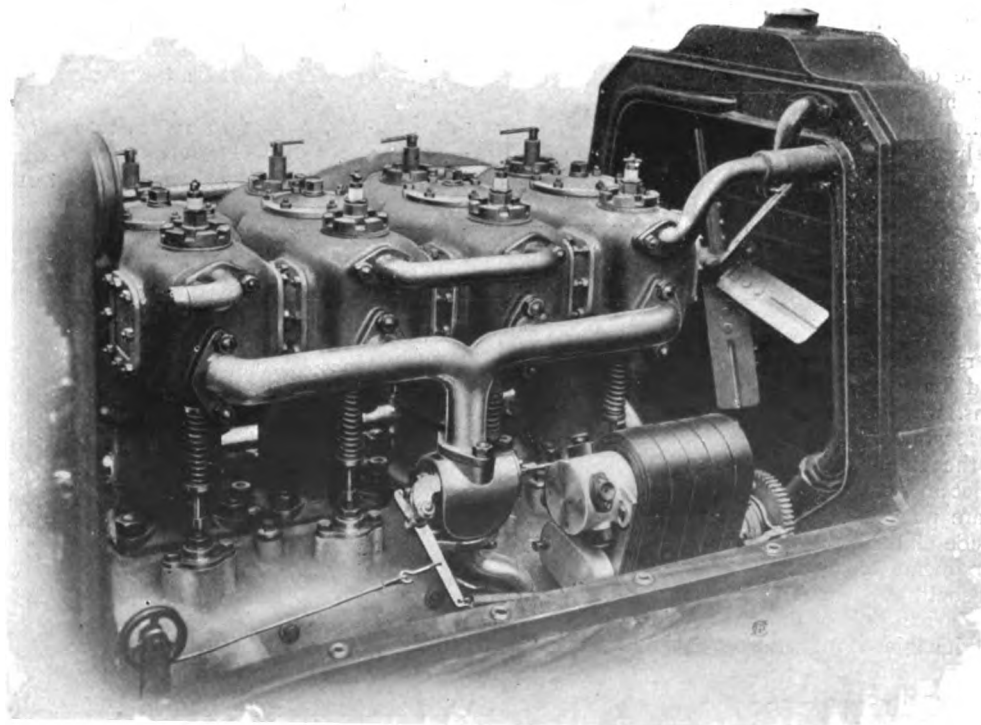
Side view of a 4-cylinder Gladiator Engine.
